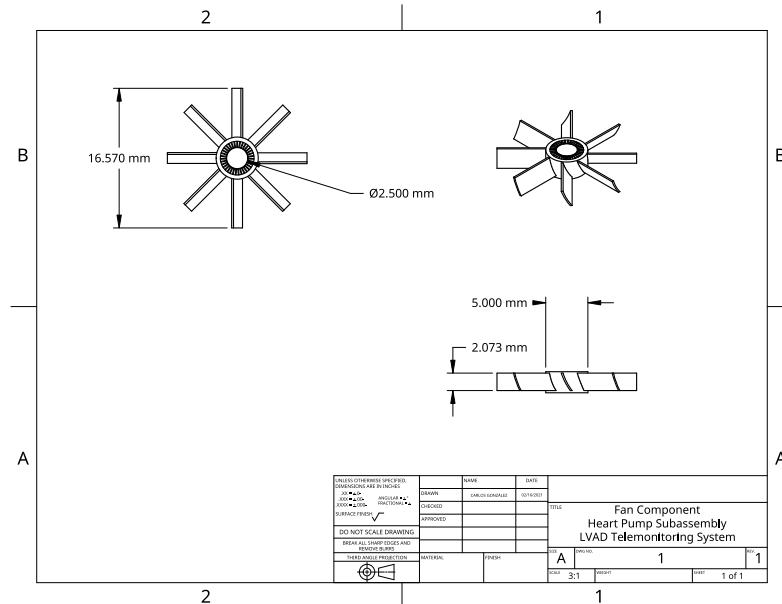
HEART PUMP DETAIL DRAWING
